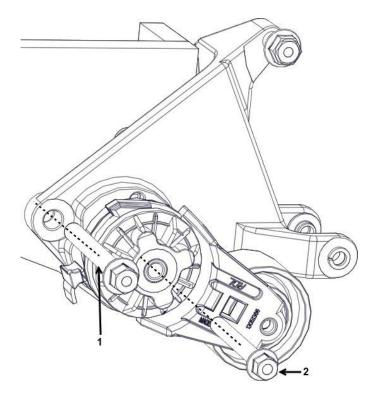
Left-Hand Automatic Belt Tensioner Assembly
